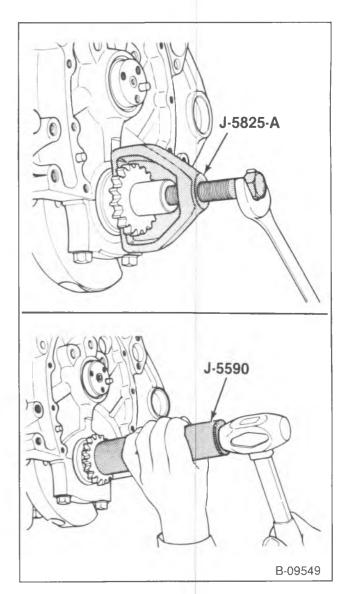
Crankshaft Sprocket Replacement (5.0L and 5.7L Engines)
